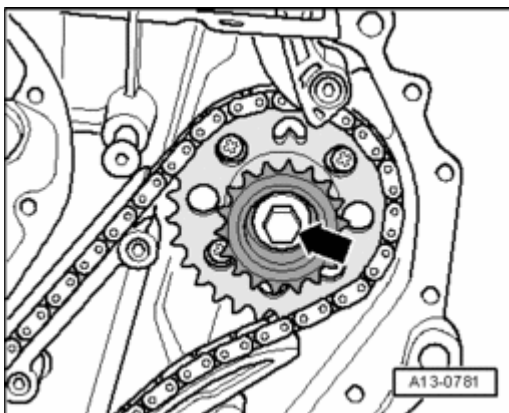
Replacing Securing Bolt For Chain Sprockets Of Intermediate Shaft
